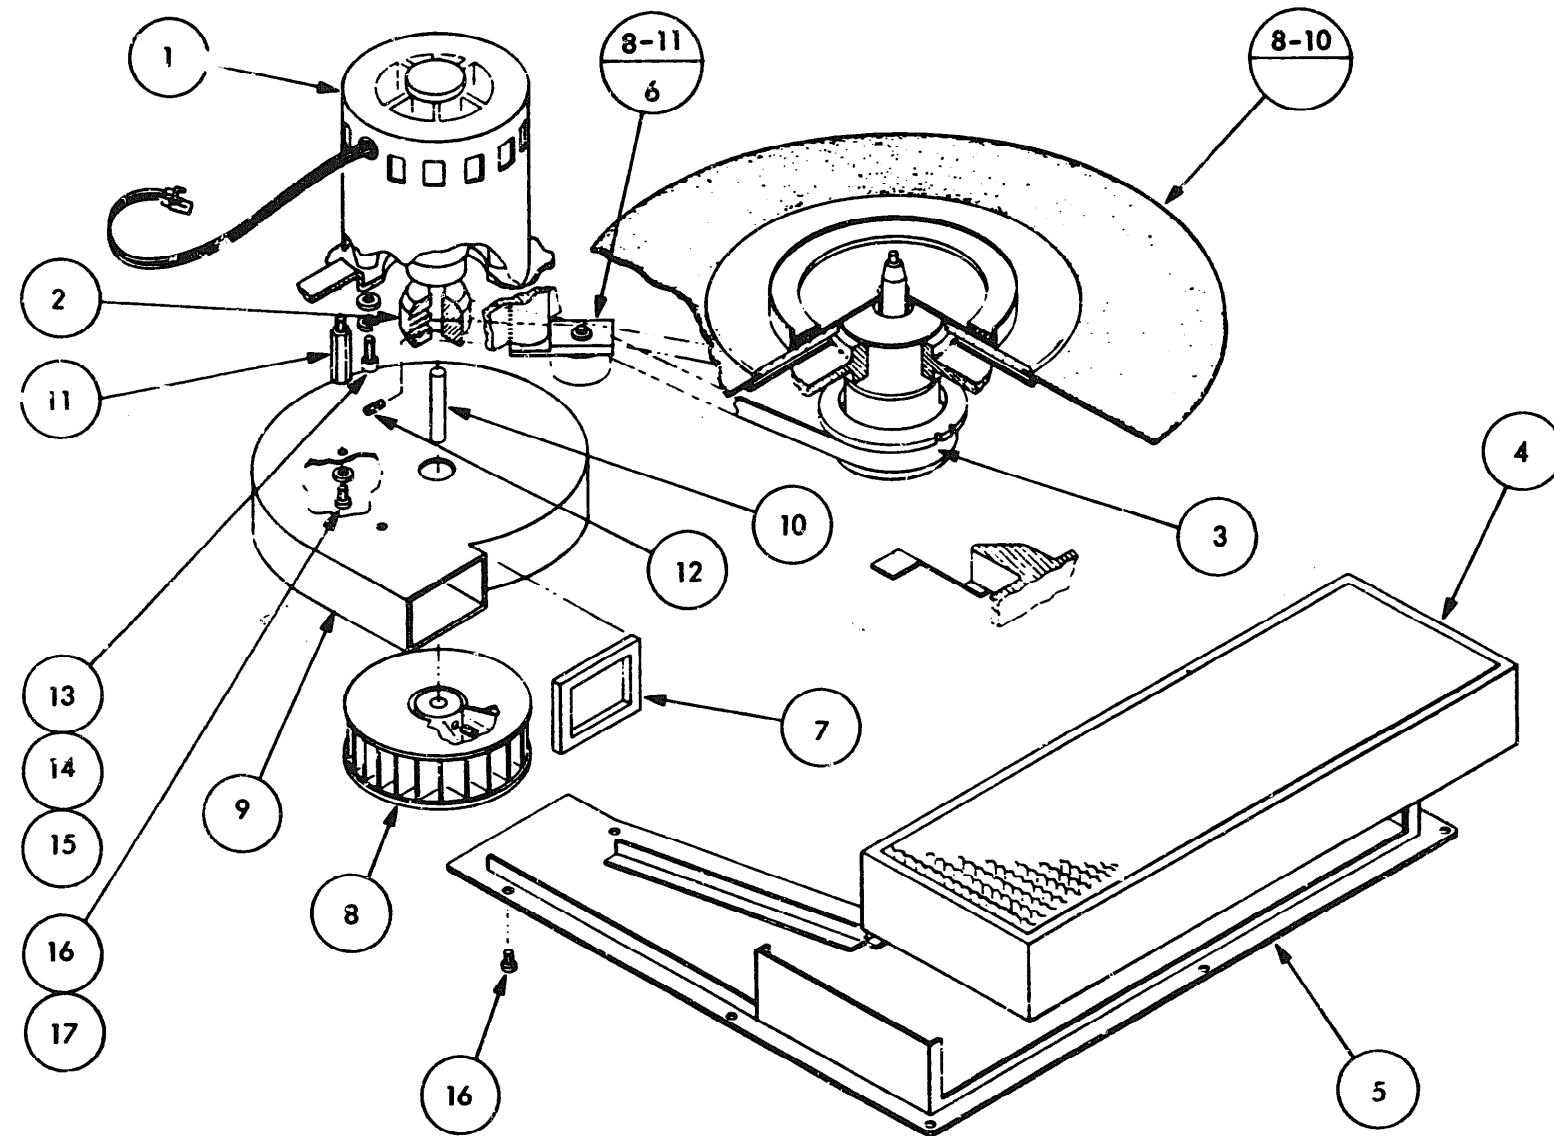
Spindle Motor, Spindle and Clean Air Groups
